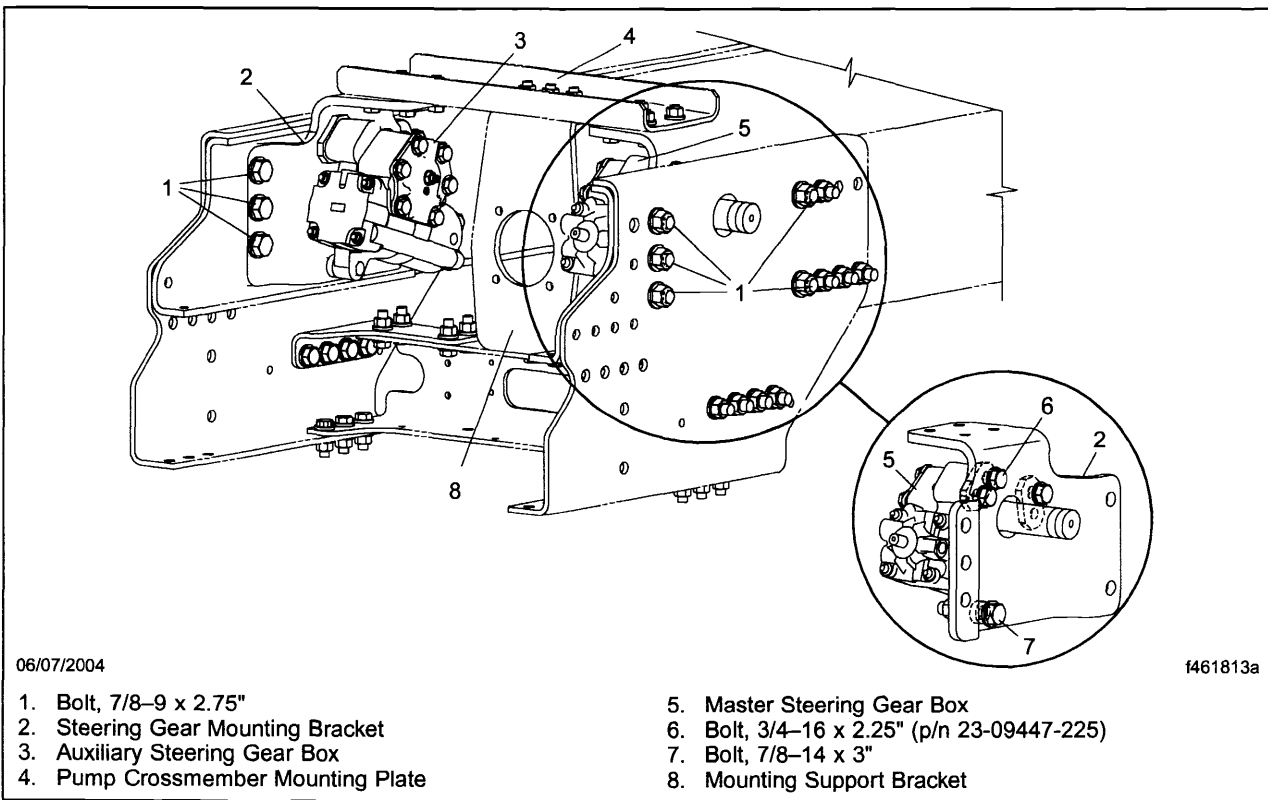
, Dual Steering Gear Mounting Bracket Assemblies (LH/RH Drive similar)
